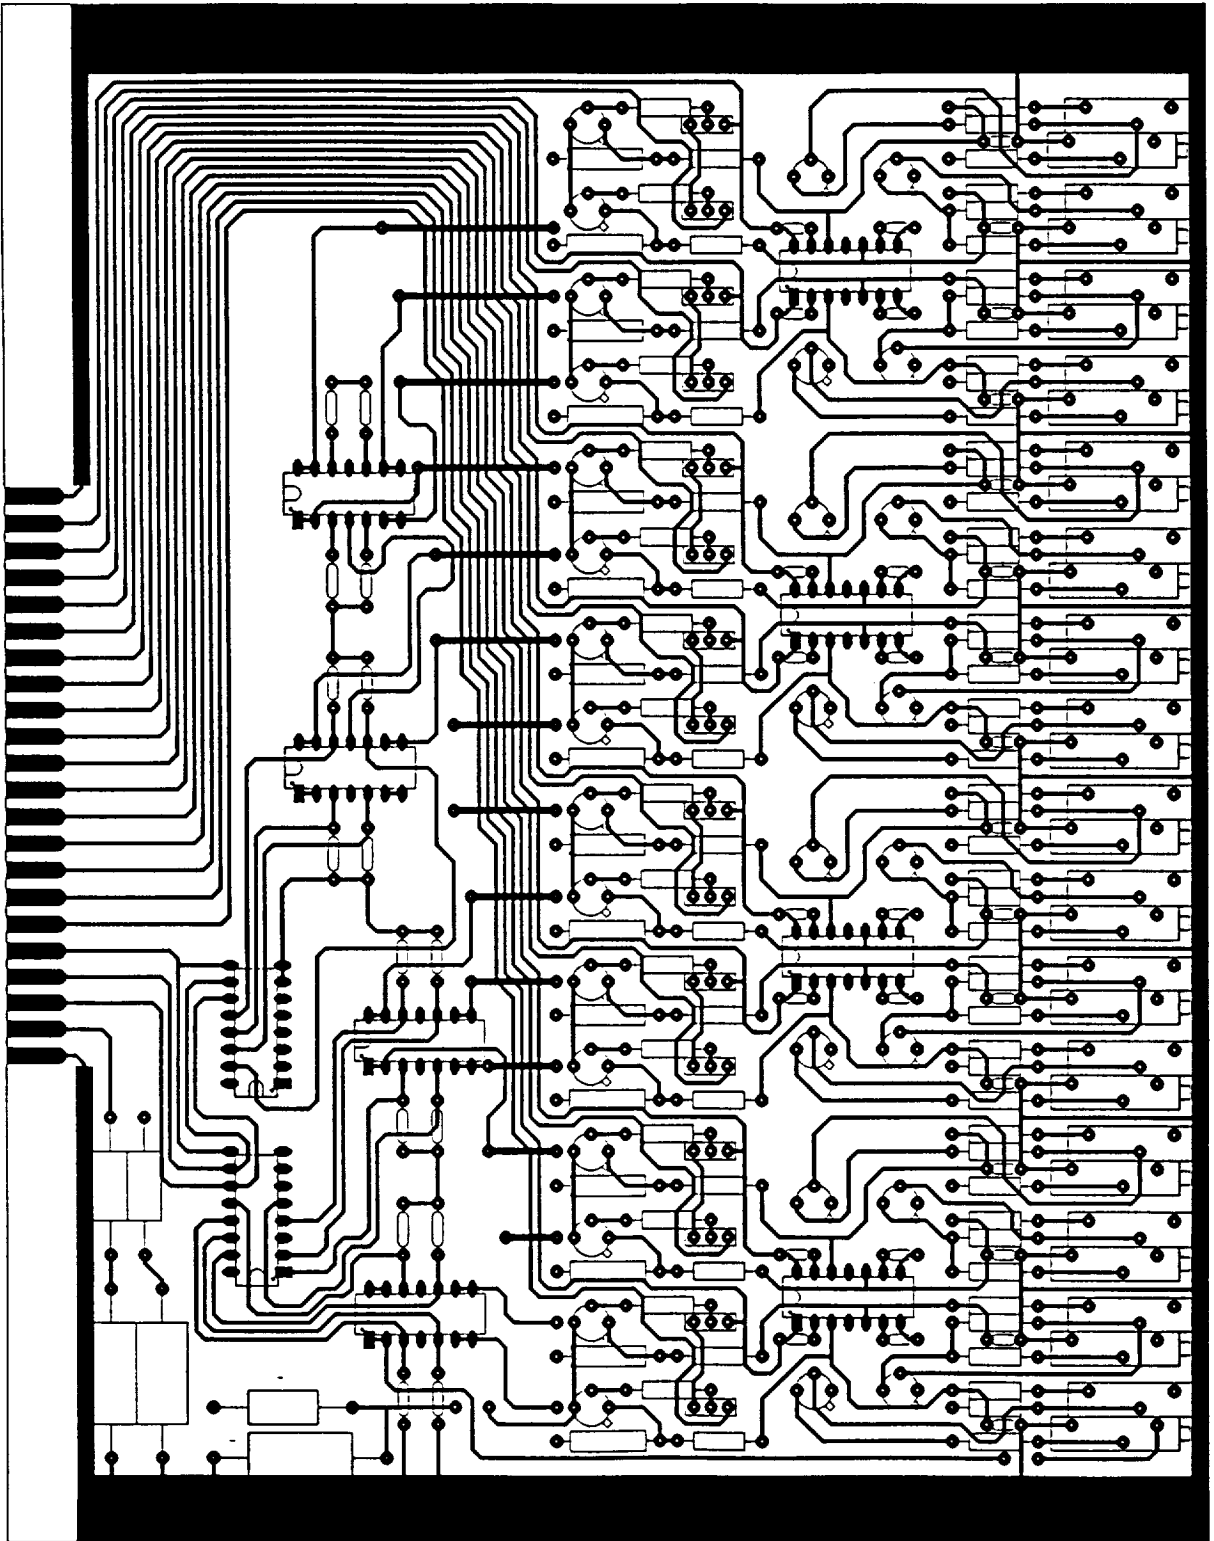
Layout of 16 control circuits on a PCB board showing the components, and the top and bottom traces.
